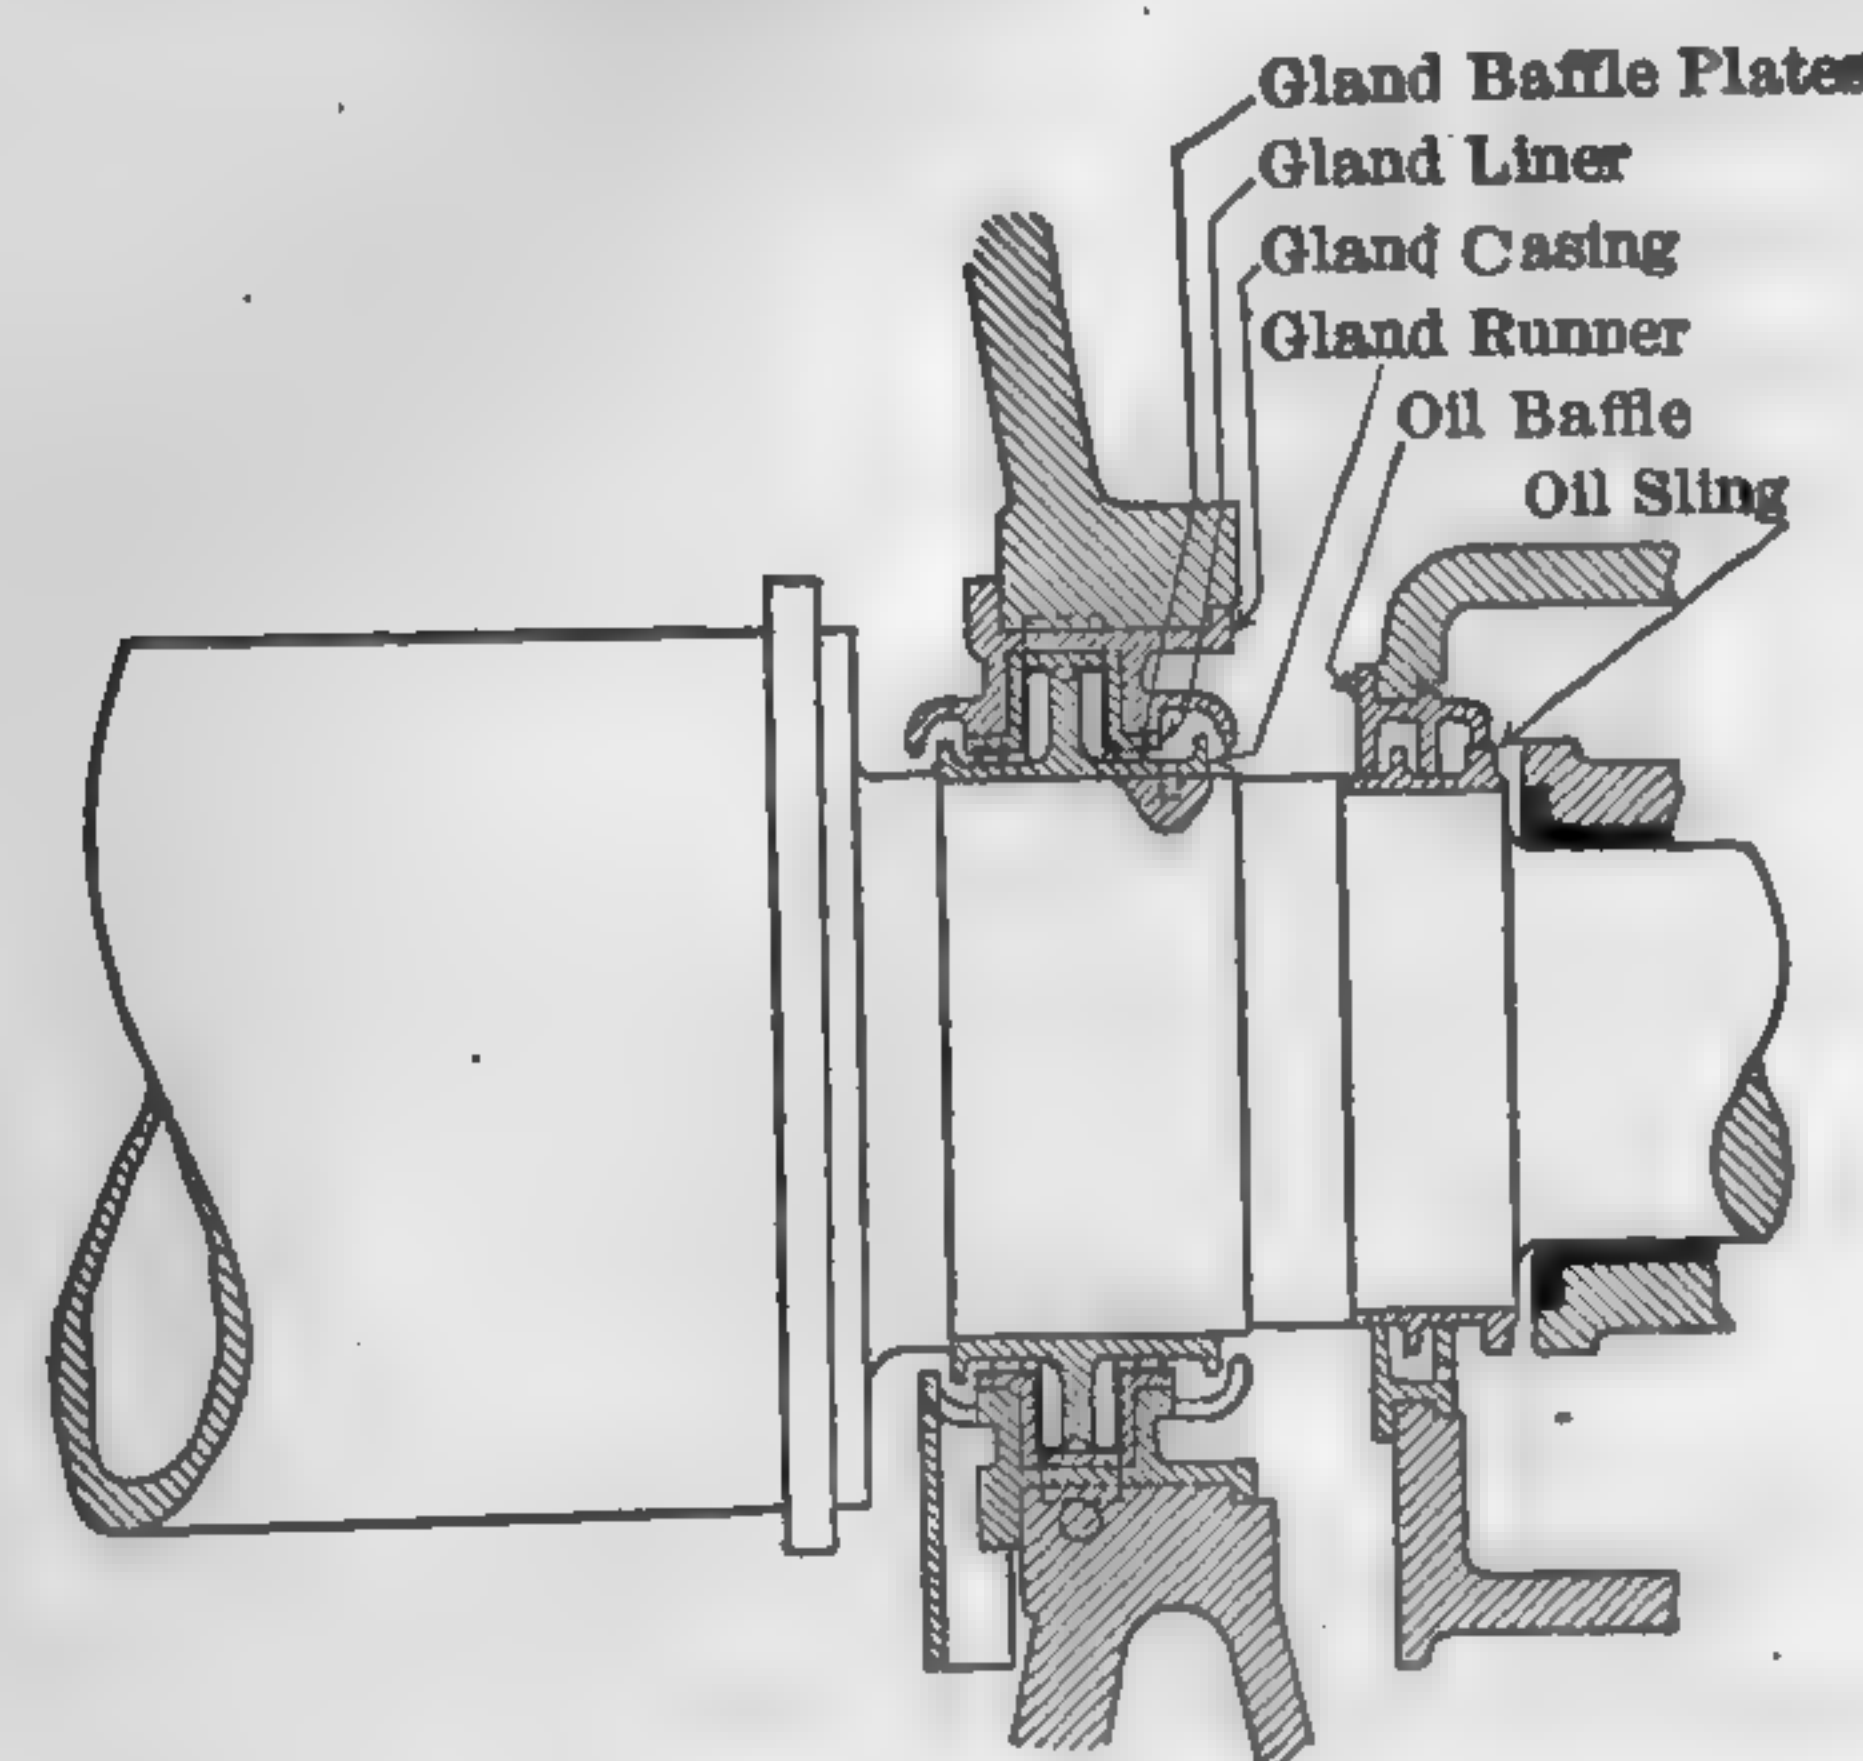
High-pressure Spindle-gland (Allis-Chalmers).
